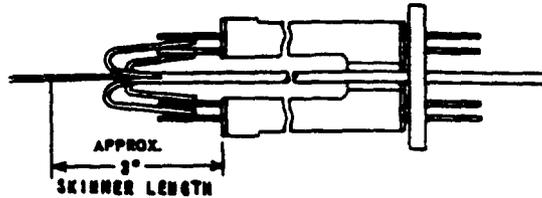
SKINNING POINT 224 TYPE TERMINAL STRIPS (WIRE WRAPPED) (PAR. 6.41)
